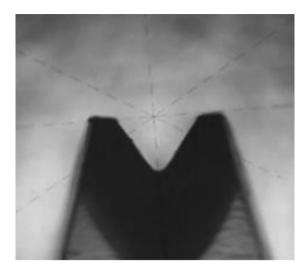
Aluminum Wire Wedge Tool with V-shaped End Face
